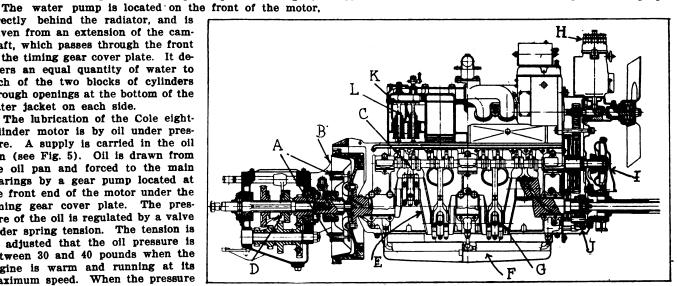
EIGHT-CYLINDER COLE UNIT POWER PLANT. reached the valve opens. The over- B, Cone Ciutch; A, Ciutch Springs Where Adjustment Is Made; D, Sliding Gear Set; C, Camshaft; E, Crankshaft; L, Valve Stem; K, Valve; G, Connecting Rod and Crankshaft Bearings; H, Delco Timer; I, Water Pump; J, Oil Pump.
